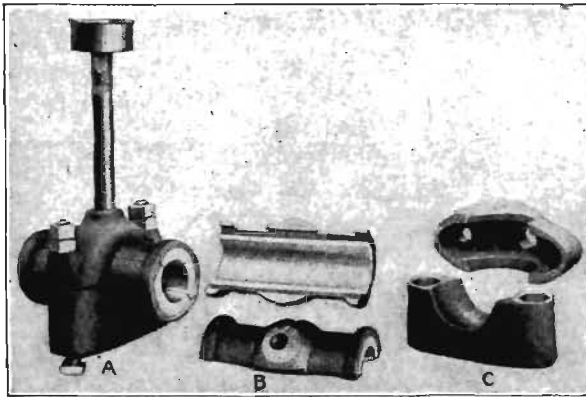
Self-aligning bearing: *A*, bearing assembled; *B*, inner unit; *C*, outer shell or socket.
